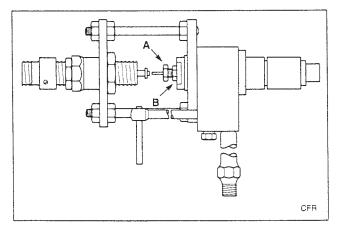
Injector Assembly Showing Pickup Mounted
